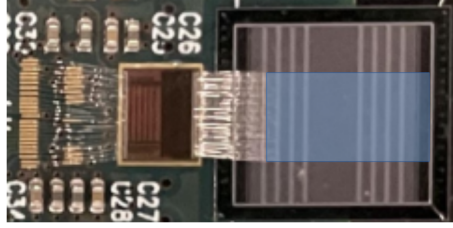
Photograph showing the sensor-front-end assembly with 64 wire-bonded strips of an S4 sensor and the placement of the ToASt-FE on the PCB.
